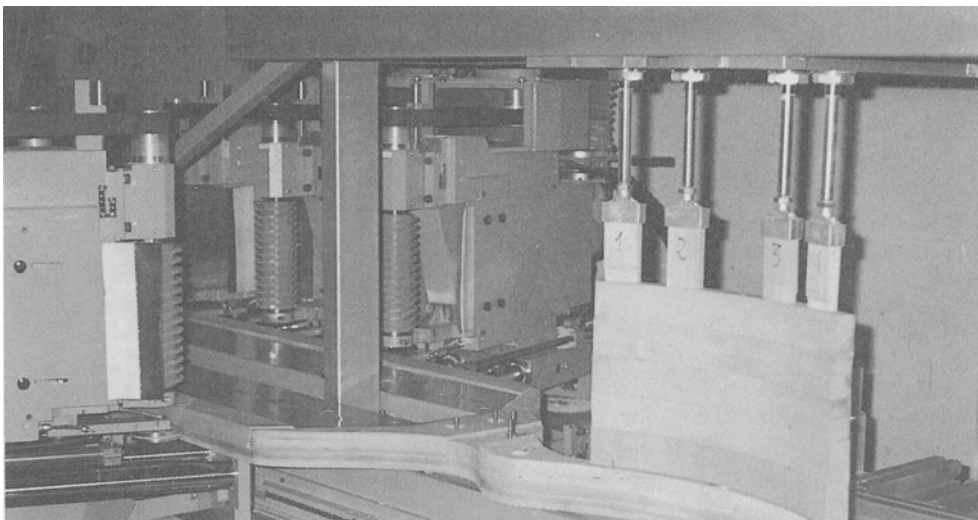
The milling machine for wood cutting and a chair back to be machined
